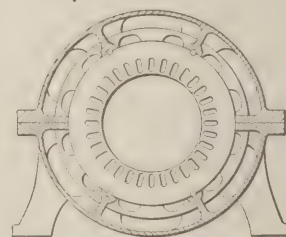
SECTIONAL VIEW A. C. MOTOR
